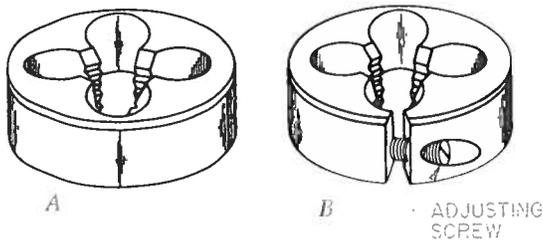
Threading dies. (A) Solid. (B) Adjustable.
